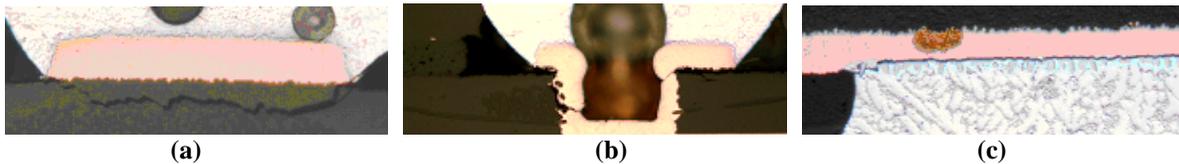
(a) Pad cratering on a surface-pad, (b) Pad cratering causes barrel cracking of micro-via; (c) Intermetallic fracture at the component side (Cu) IMC layer.
